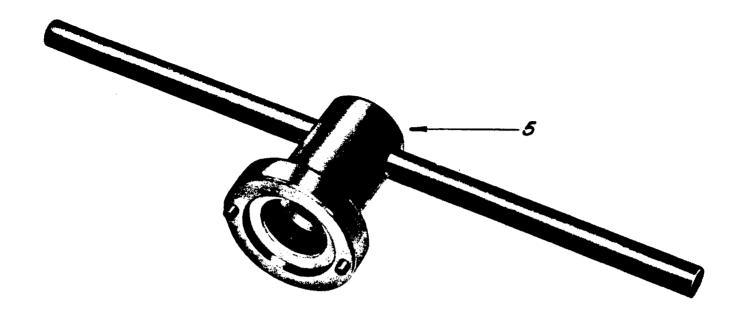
Sprocket Shaft Bearing Nut Wrench, Part No. 97235-55.
